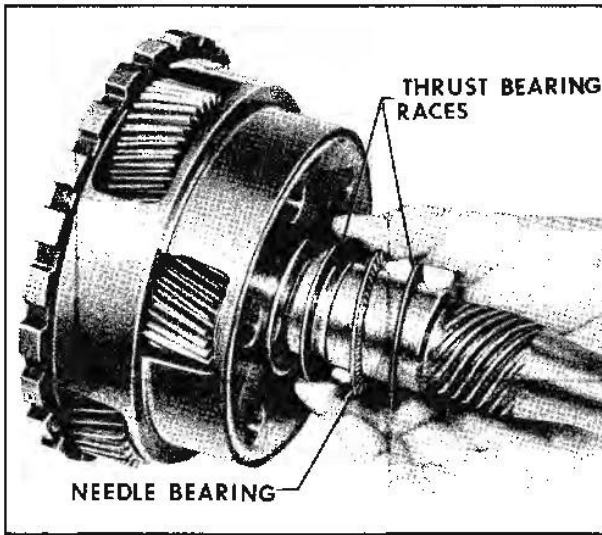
B-61 Removing Planet Carrier Thrust Bearing and Races
